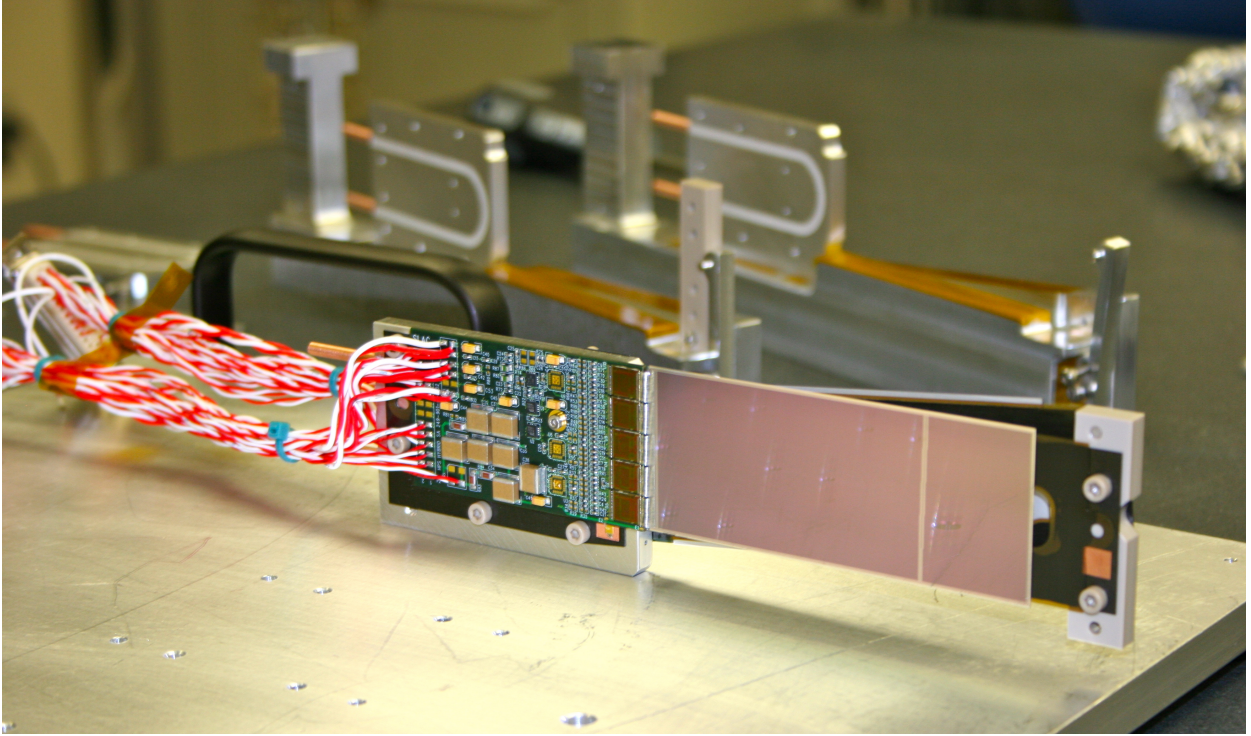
A prototype module assembly (foreground) with the 50 mrad (left) and 100 mrad (right) module assembly fixtures in the background. A pair of cooling blocks and a spacer block can be seen on the fixtures.
